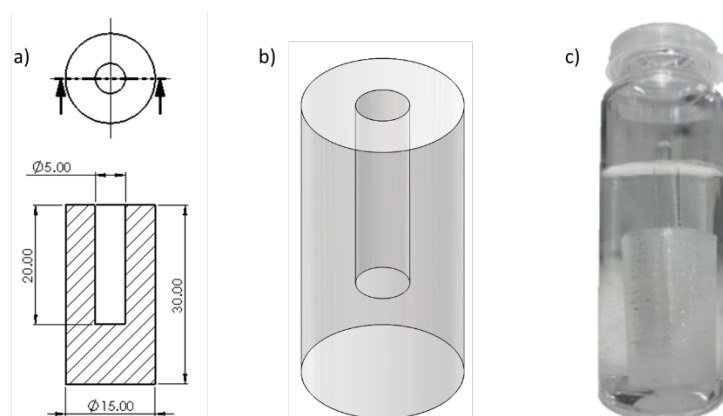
The 3D-printed samples used during compatibility testing. (a) Detailed drawing of specimen showing a cross-section through the centre, (b) 3D-model of the specimen. (c) PP specimen sample bottle during compatibility test, held in solution using a 4 mm diameter glass rod.
